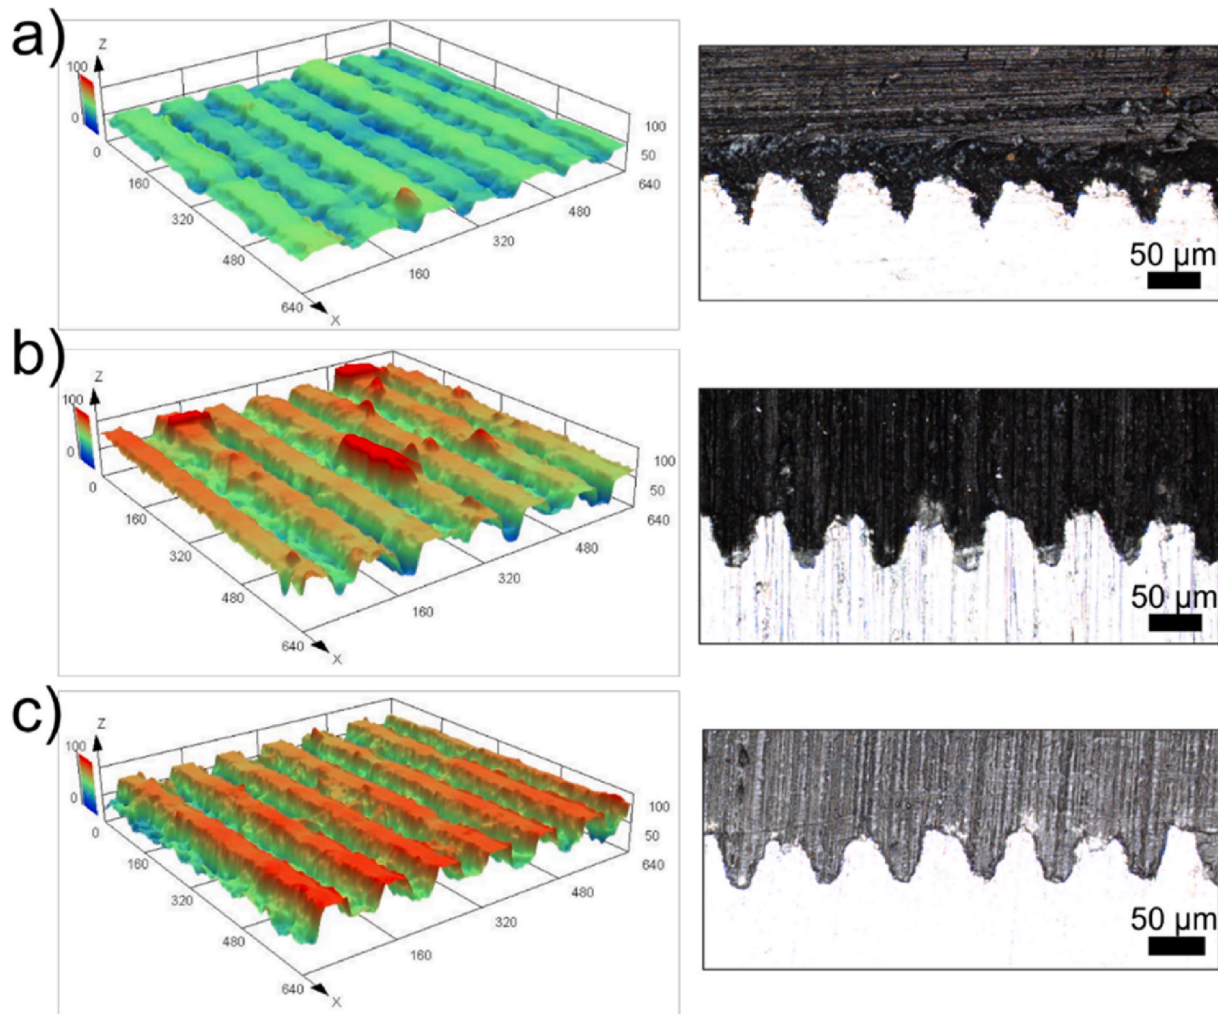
On the left-hand side laser confocal microscopy images of polymer fracture surfaces and the right-hand side images obtained in the laser confocal microscope of the cross-section of PC/AA6061 joints injection overmolded under the following conditions: a) C1 (minimum levels); b) (center point - CP); and c) C4 (maximum levels). In the cross-section images, metal and polymer parts appear as light and dark, respectively.
